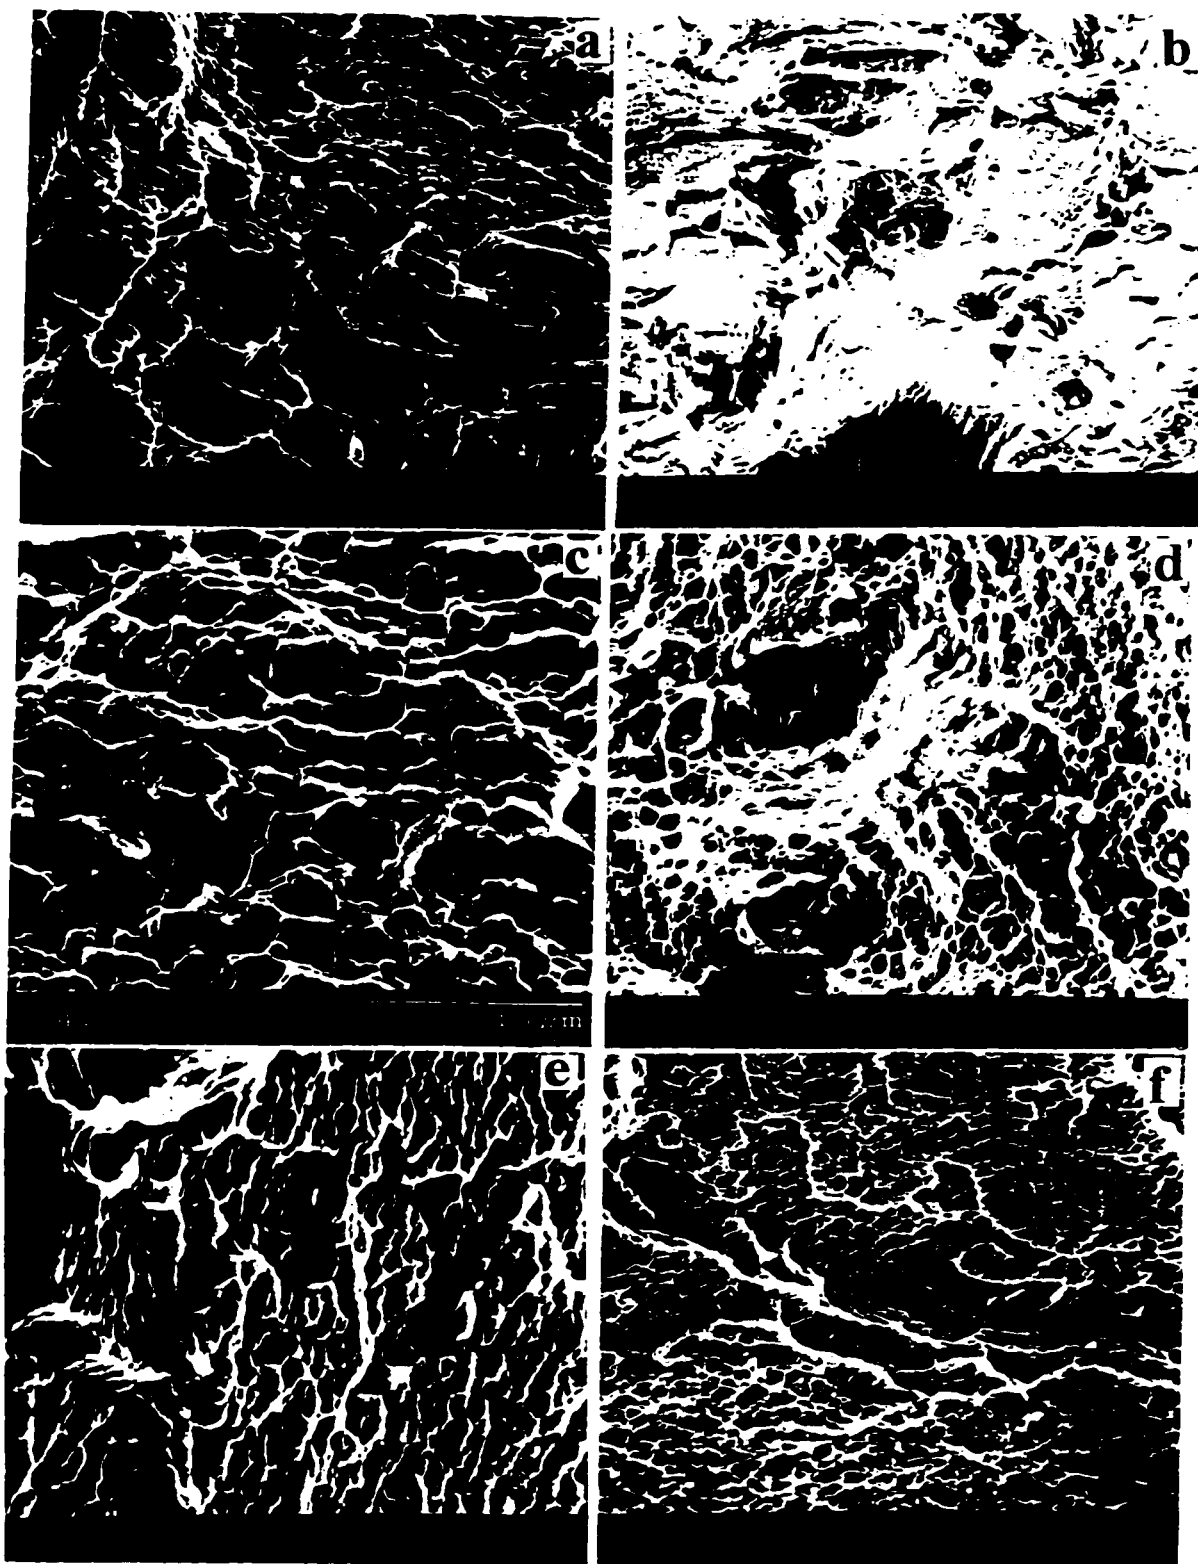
Fractographs showing the quasi-cleavage and dimple-ductile fracture observed at 650°C with
